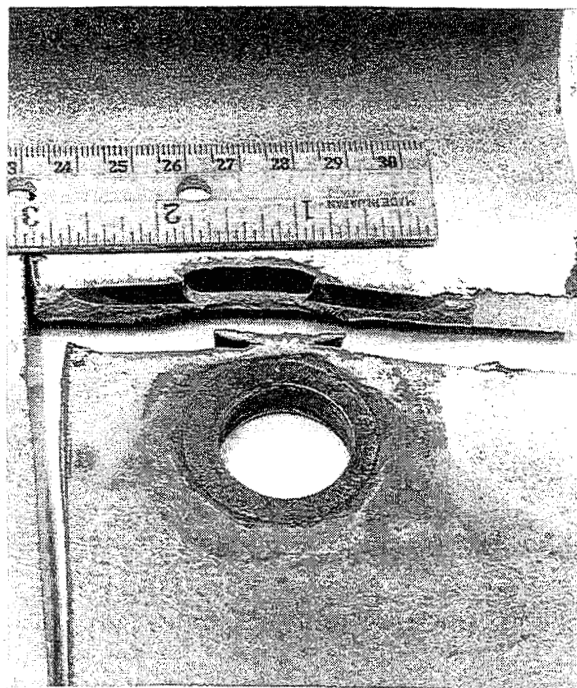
Fatigue Crack In Front of Bolt
